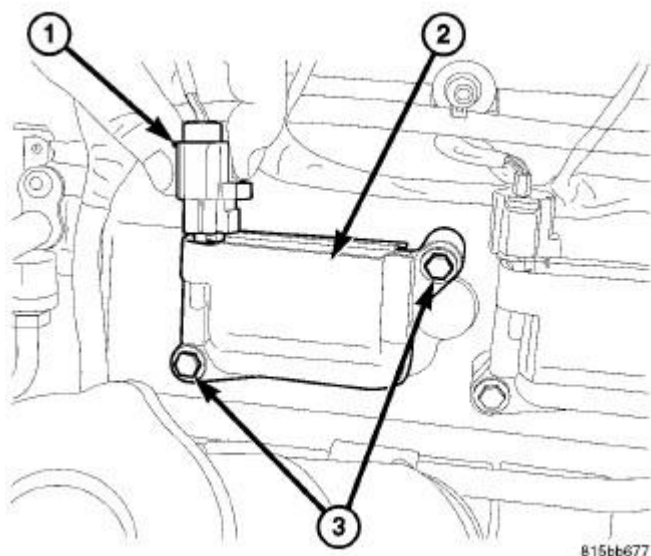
Ignition Coil Connector, Ignition Coil & Mounting Bolts
